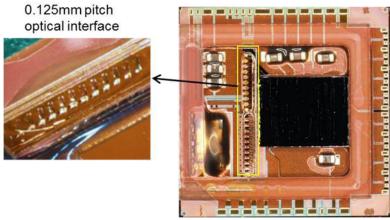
EXAMPLE OF PIC PACKAGE W/125 μM PITCH OPTICAL INTERFACE [35]
